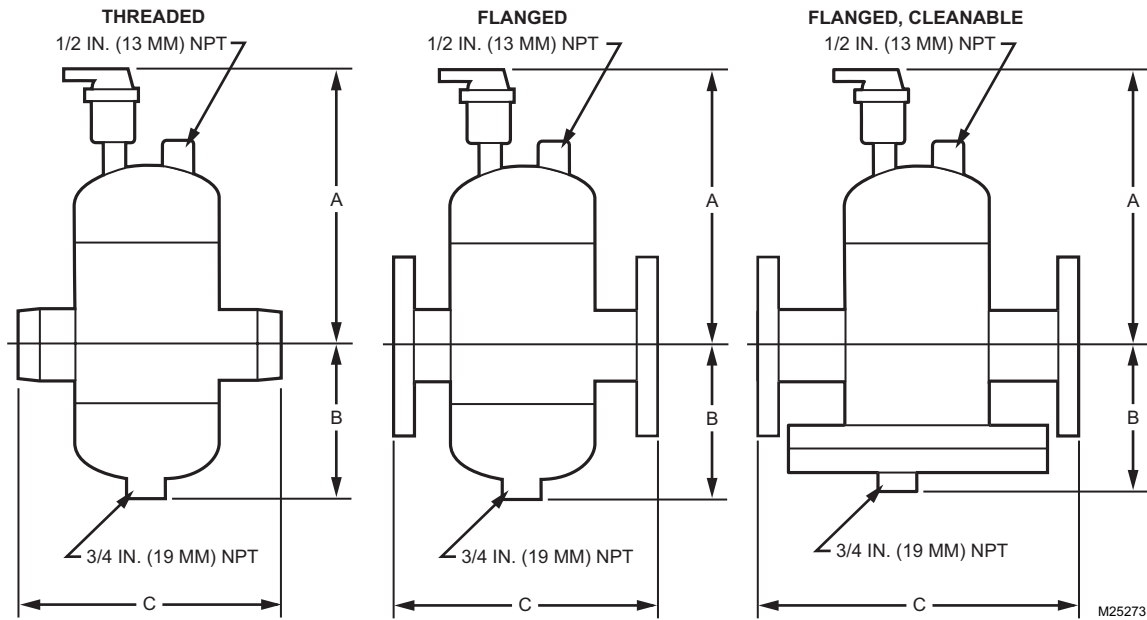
Commercial SuperVent 2 in. - 8 in. Pipe Size dimensions.
